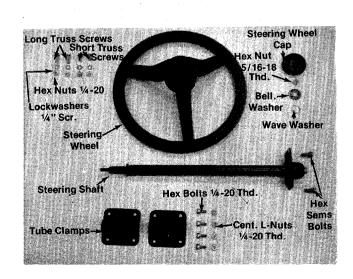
PARTS IN CARTON AND HARDWARE PACK
